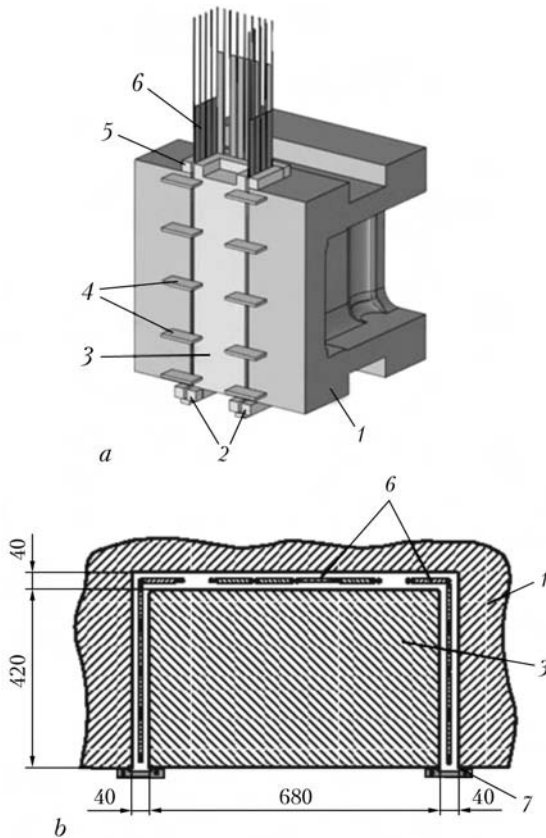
General view (a) and scheme of assembly for consumable-nozzle ESW (b): 1 – welded part; 2 – inlet implantate; 3 – forged insert (implantate); 4 – technological bars; 5 – outlet pockets; 6 – consumable nozzle; 7 – forming devices
